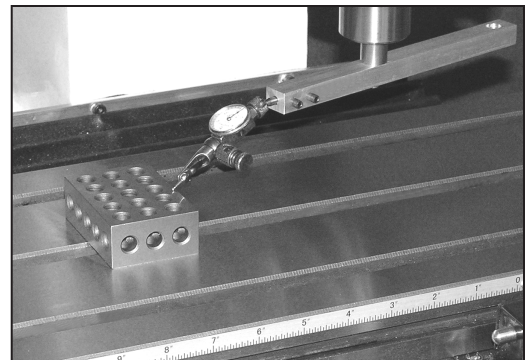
Sweeping holder for dial indicator. This example shows a rectangular section aluminum bar with threaded holes allowing the choice of two sweep diameters, 6" and 10", measured from spindle centerline to indicator tip. The smaller sweep can be used for front-to-back tramping, also left-to-right as here. For more sensitive left-to-right tramping, use the larger sweep.
